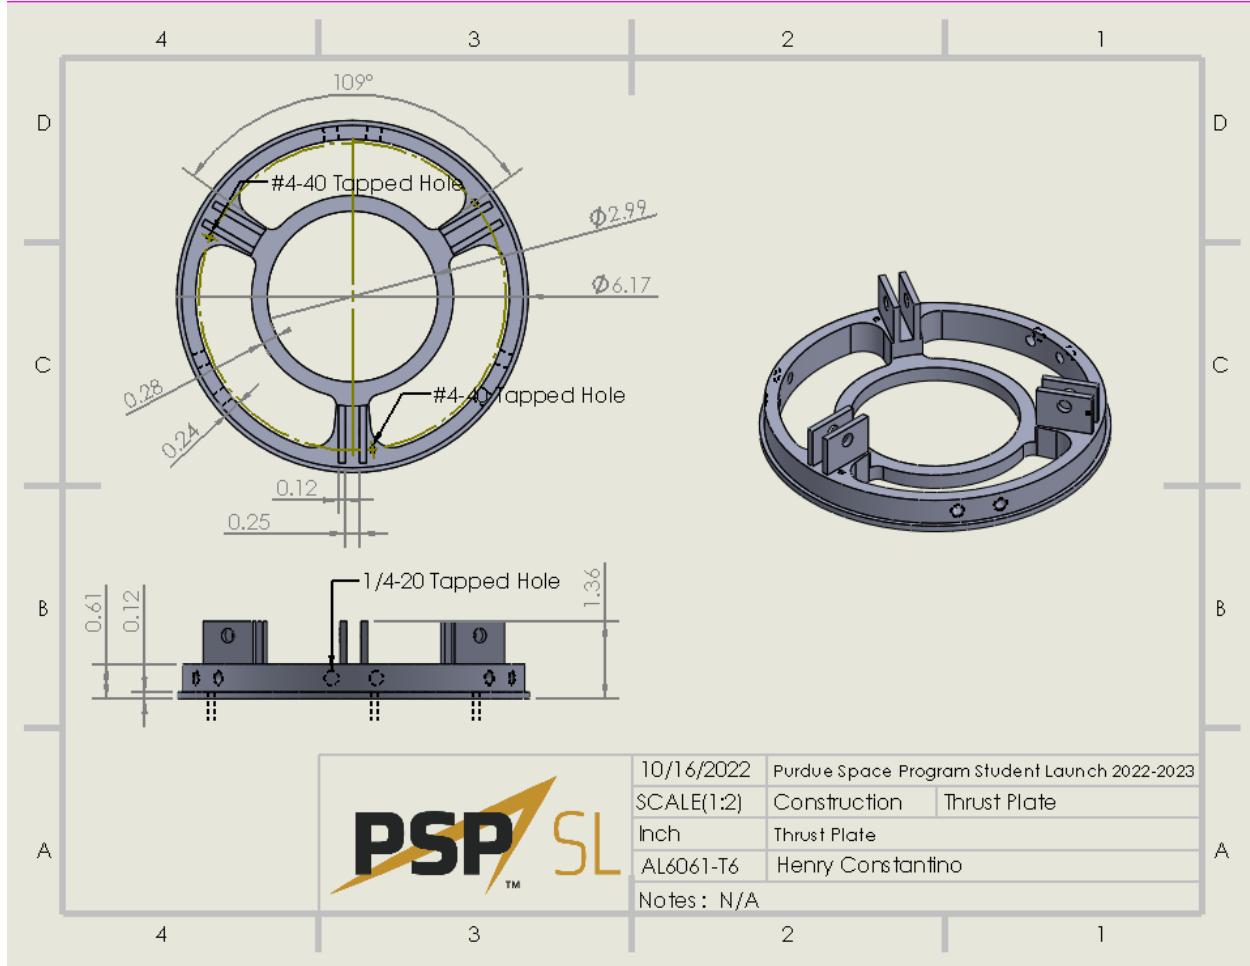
Technical Drawing for Thrust Plate
